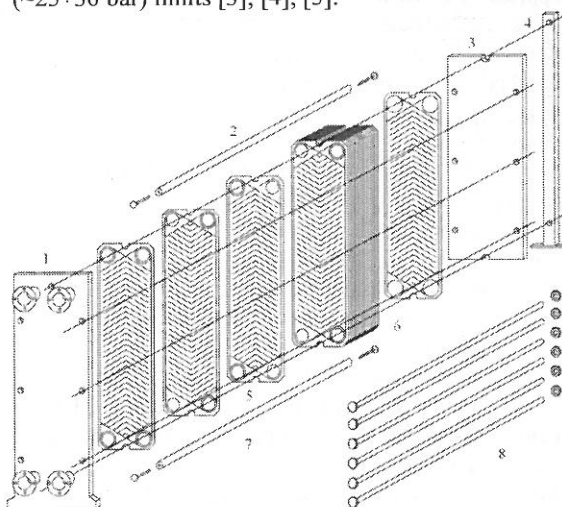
Gasketed plate and frame heat exchanger: 1-fixed support, 2-beam for centering the plates, 3-moveable support, 4-support, 5-plate with the gasket, 6-package of plates, 7-supporting beam, 8- anchor bolts
